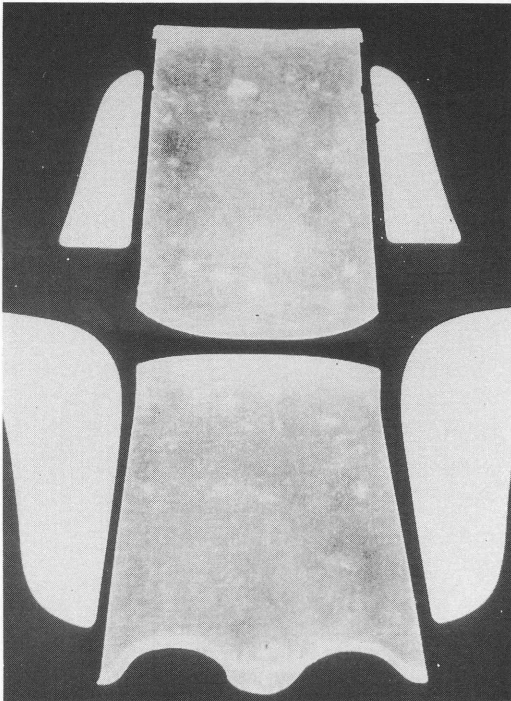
Seat, back, two upper side, and two lower side inner sections to be mounted in the seatshell.
